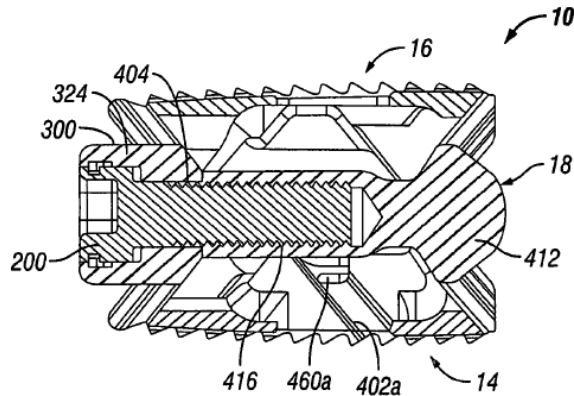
of the '732 patent, reproduced above, depicts the expandable fusion device having actuator assembly 200, which includes head portion 324 and extension 404. *Id.* at 22:33–35. Rod-receiving extension 416 of central ramp 18 is threaded to receive threading of extension 404 of actuator assembly 200. *Id.* at 22:64–67.
